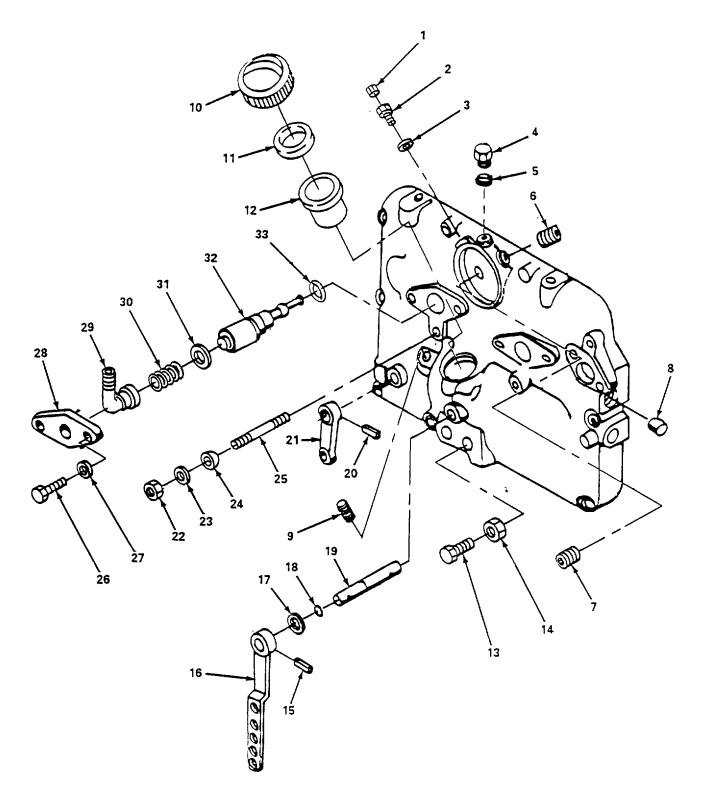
Injection Pump, Repair (Sheet I of 3).
